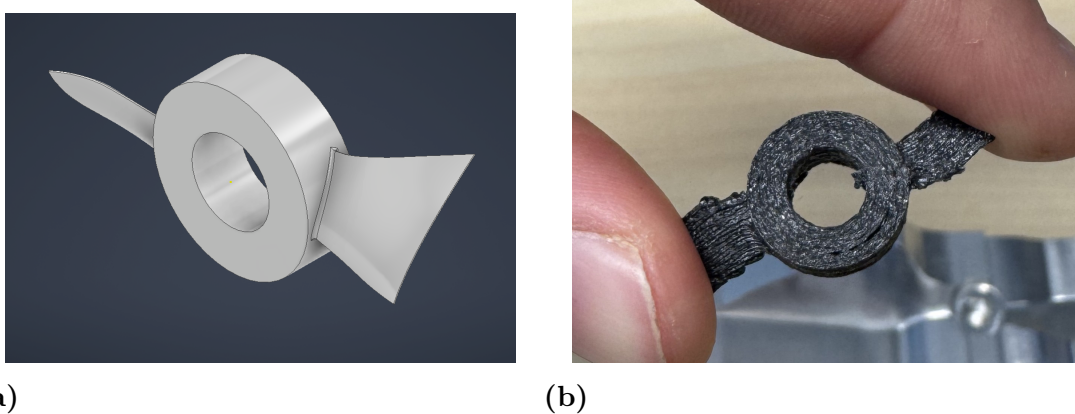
(a) CAD of propeller hub insert, (b) 3D printed propeller hub insert.
